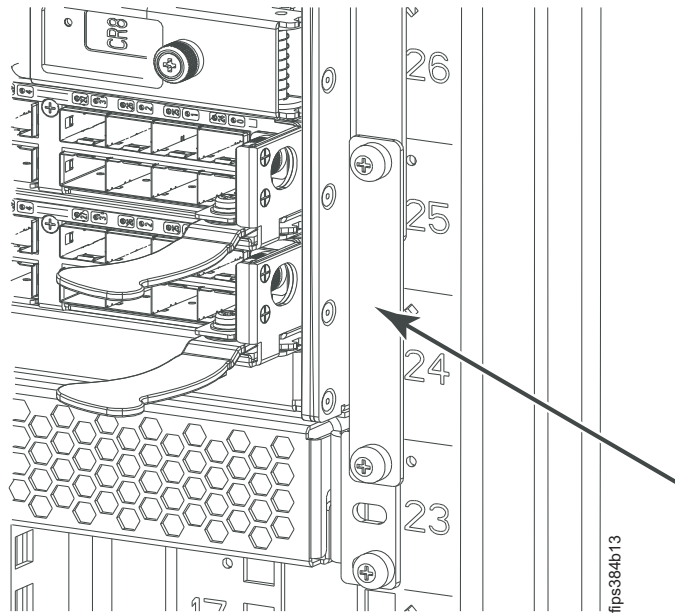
Lower right 2499-192 FIPS bracket installation (detailed port side view)
